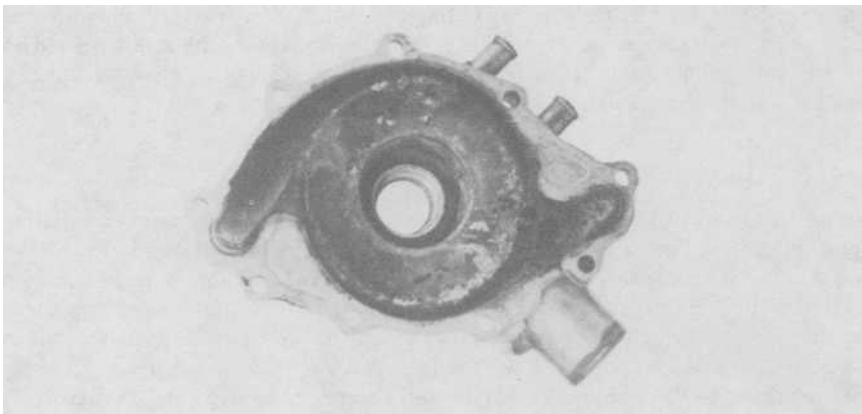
Coolant pump damaged by cavitation-erosion-corrosion. Pitting can be controlled by a properly inhibited antifreeze coolant that is used as directed by the manufacturer.
